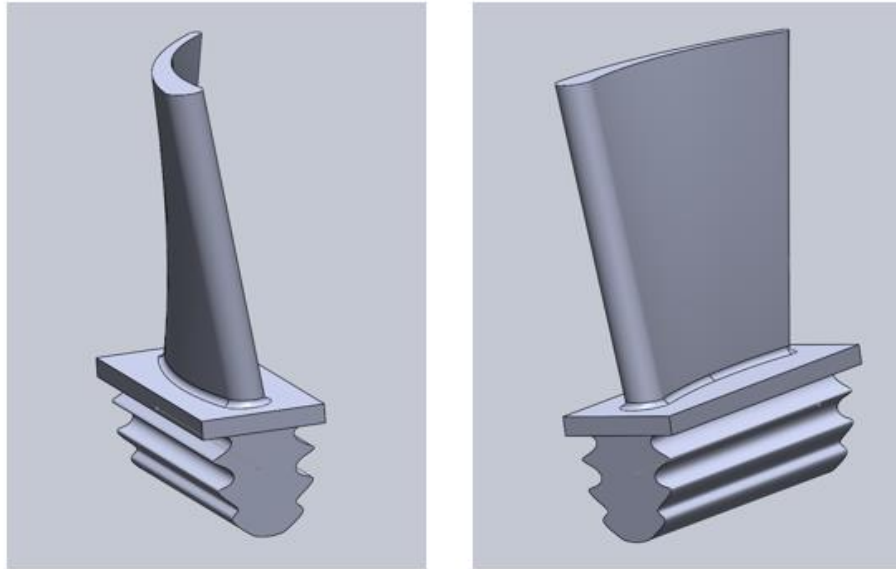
3D blade geometry drawn in SOLIDWORKS.
